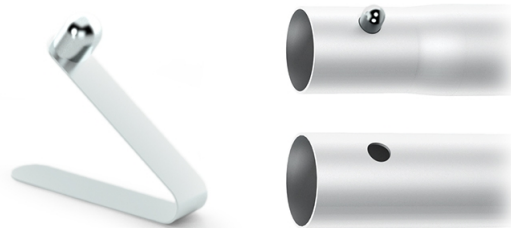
Spring Button Telescopic Tube Ends [22].
